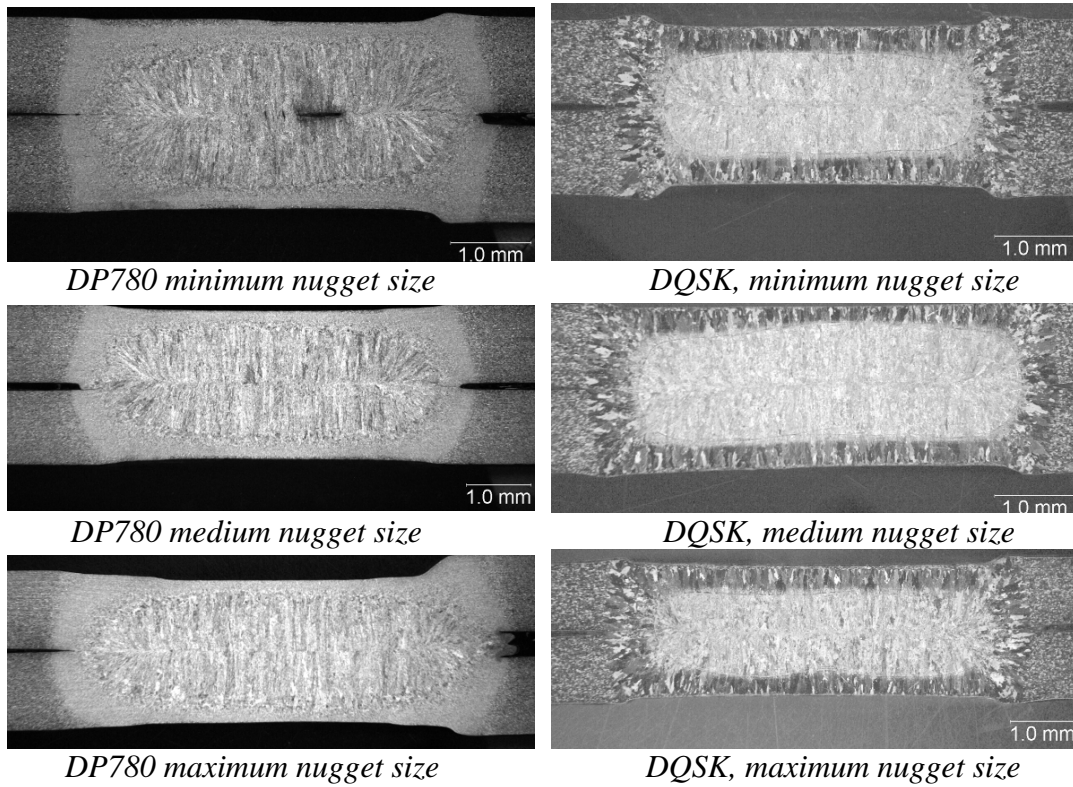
Weld nugget appearance of DP 780 and DQSK welds. Solidification void was observed in DP 780 welds.
